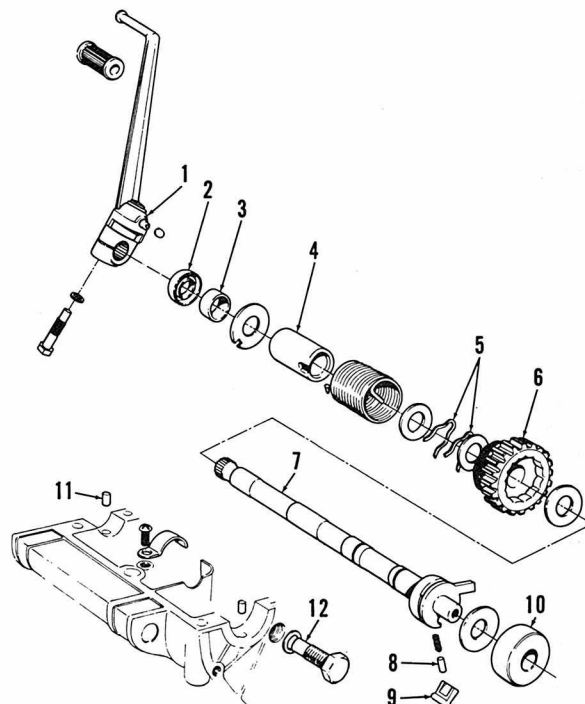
Exploded view of kickstarter assembly and related parts.
